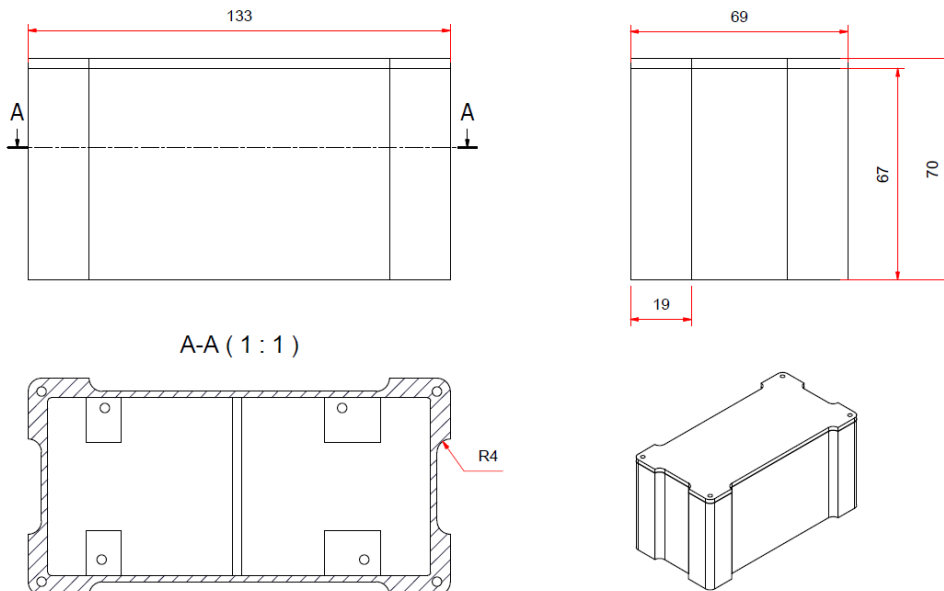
Projected and section view of housing body and lid. Internal mounting points are shown in the section view.
